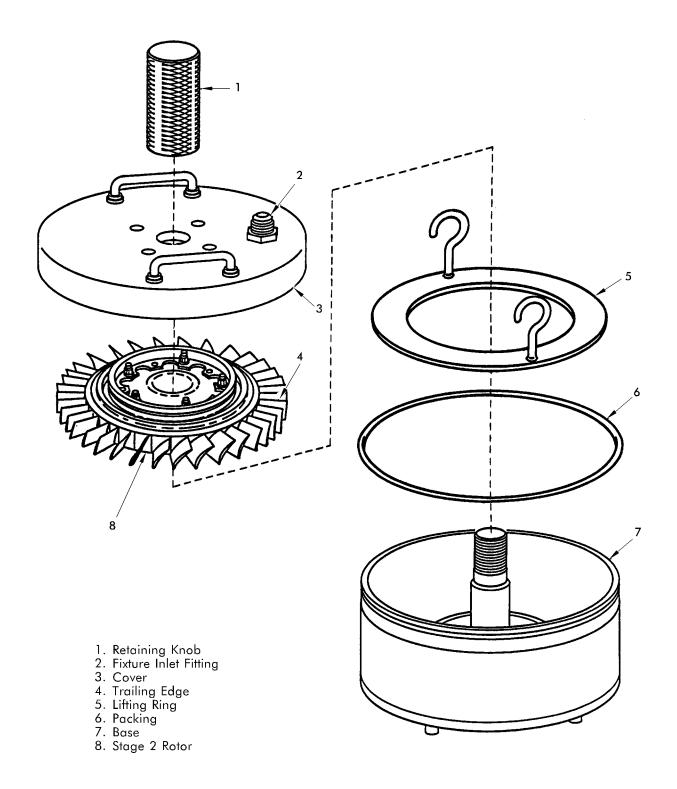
Stage 2 Gas Generator Rotor Reverse Pressure Flushing Fixture 21C7787G01
